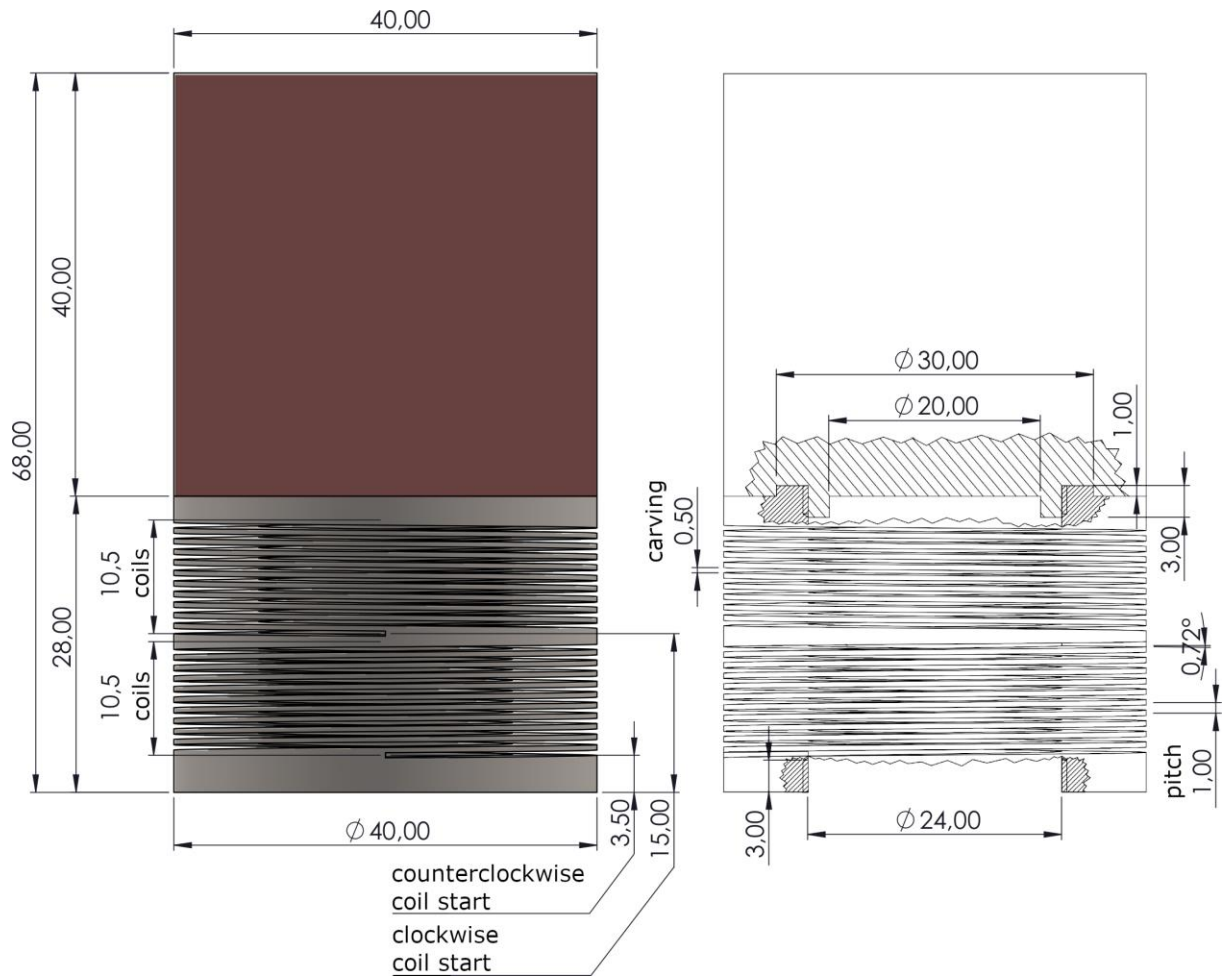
Dimensioned CAD of the proposed suspension system, composed of a C17200 alloy test mass and a Titanium Beta C alloy spring, Helical-C model. Front and right view with cross sections details of the threaded couplings
